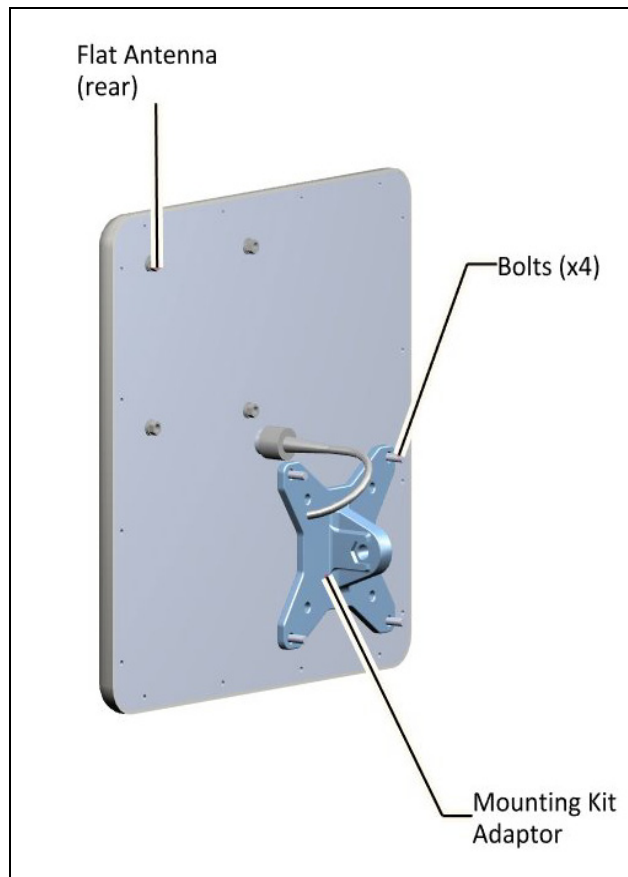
Flat Panel antenna - rear with mounting kit adapter
